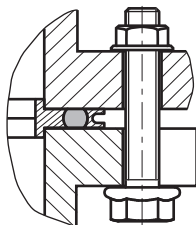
Flange connection ISO-F, hexagon head screw and through hole
